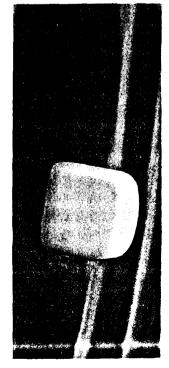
Illustration No. 132 1935 Door Side Rubber Bumper Lower Front Door and Rear Door
